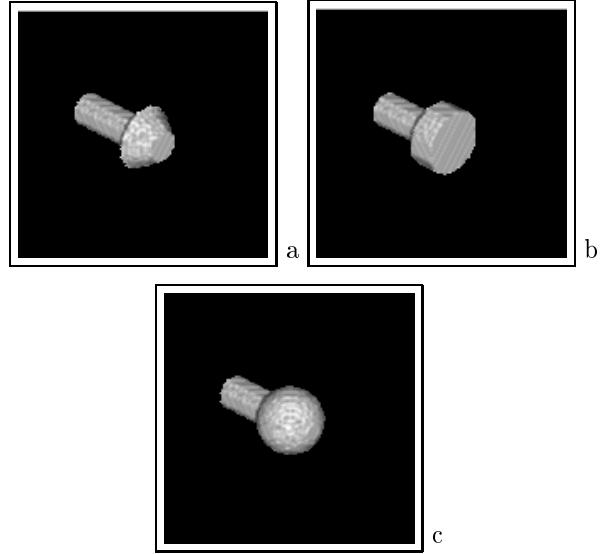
The three types of bur tools that are used. (a) Cylinder-Conical Tool. (b) Cylindrical Tool. (c) Spherical Tool.
